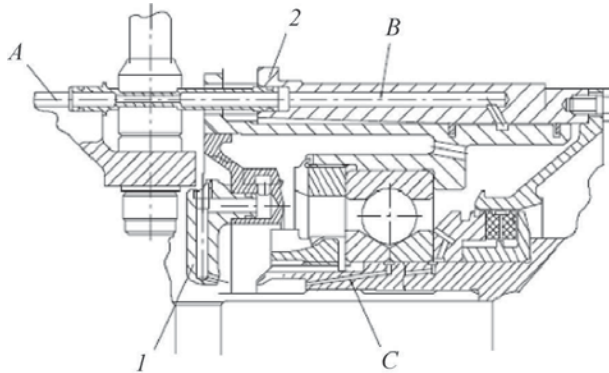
Front support of the UGT25000 high-pressure compressor [20]:
